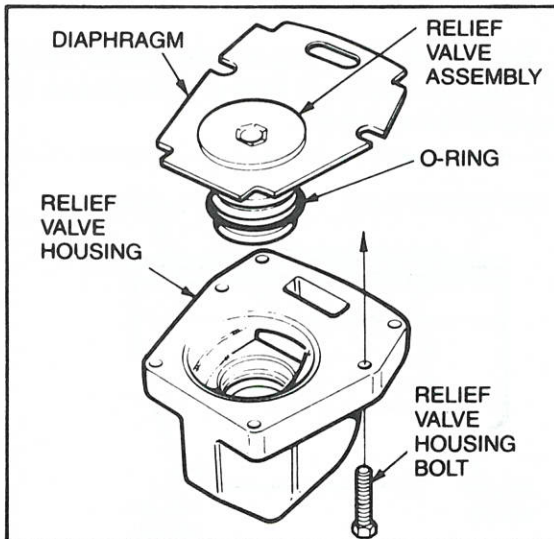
A. RELIEF VALVE ASSEMBLY FRP-I
